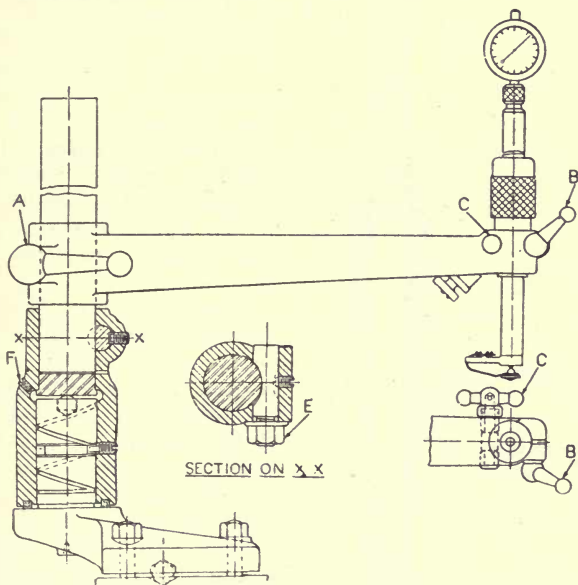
SUPPORTS FOR CONTINUOUS READING CALIPER. (BLANCHARD GRINDER)
